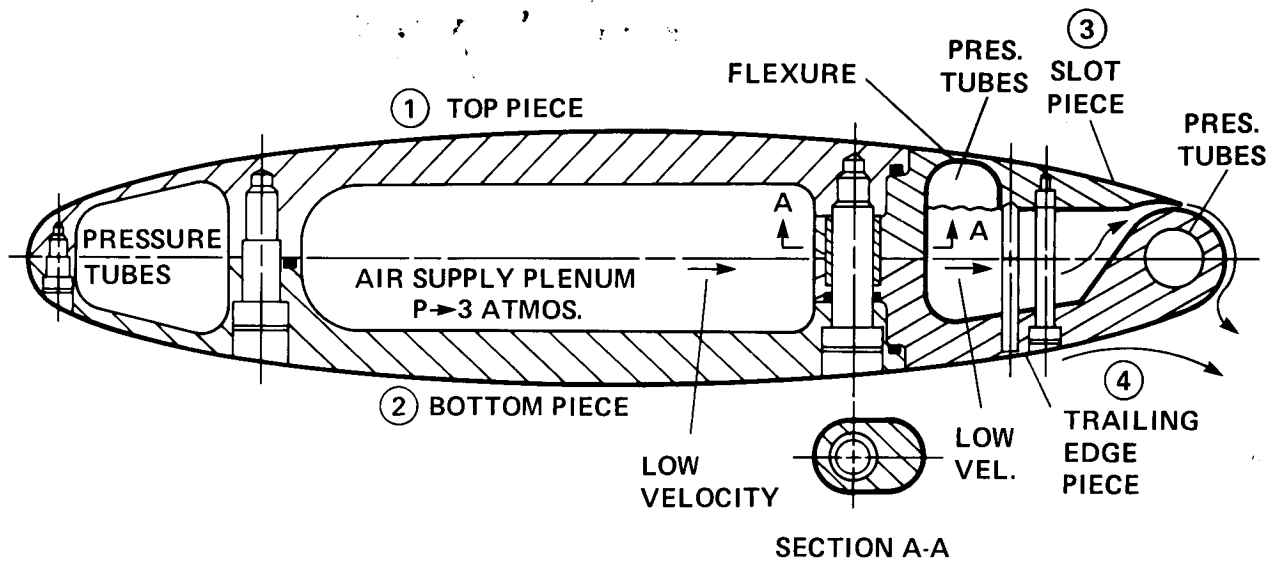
Wing section showing four-piece construction, bolts setscrew, and adjusting screw for slot height.
